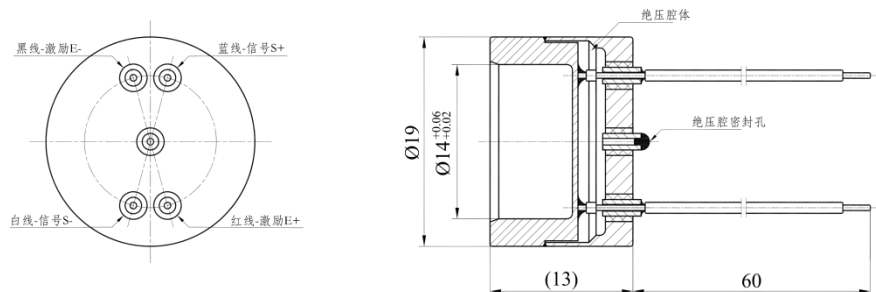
Dimension of absolute pressure or sealed gauge and lead definition
